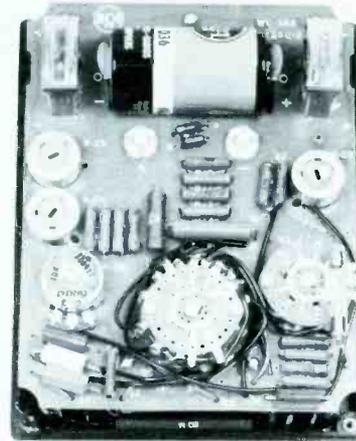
Kit or factory-wired, the WV-38A utilizes a one-piece printed board.
